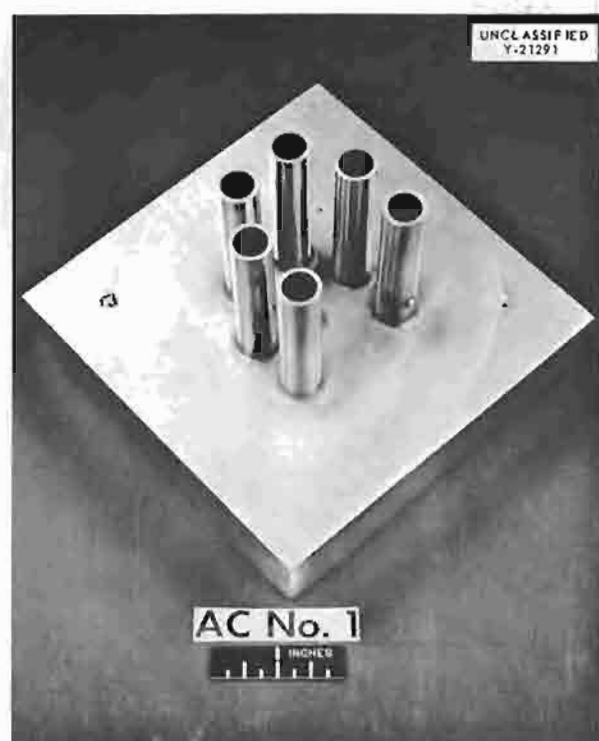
Tube-to-Header Sample Shown in Fig. 3.4.11 After Brazing.
